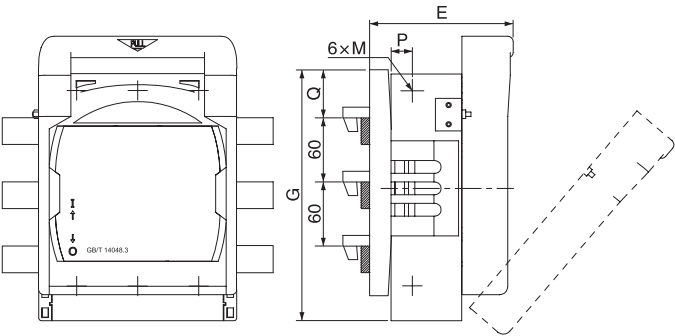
Installation and outline dimensions drawing for HR17N series busbar type
